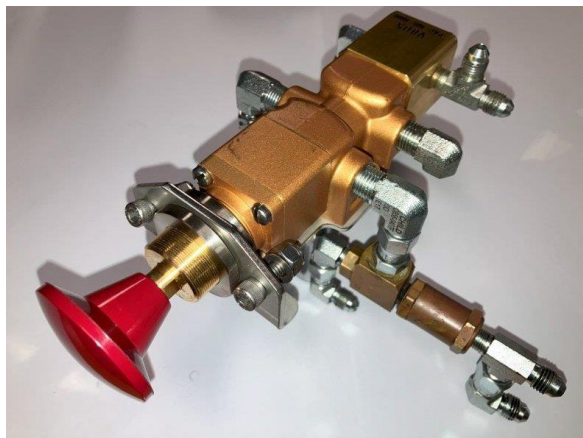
New Park Brake Valve assembly front/top view, showing mount bracket installed.
